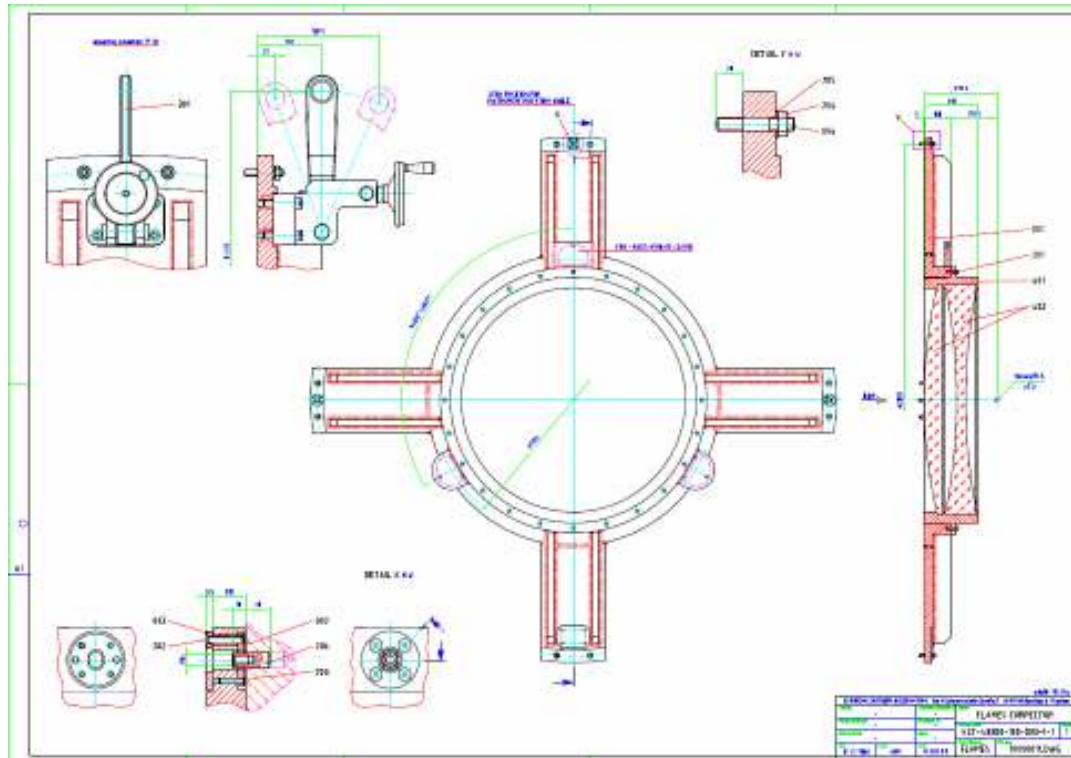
Quartered drawing of the mounting structure of the FLAMES corrector at the VLT.
